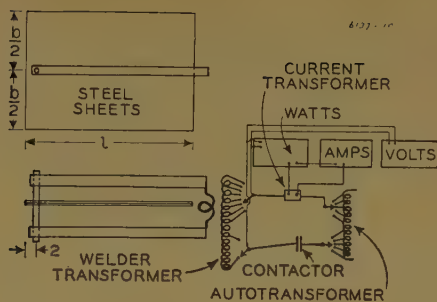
Circuit for measuring impedance of steel work pieces inserted in welder throat
